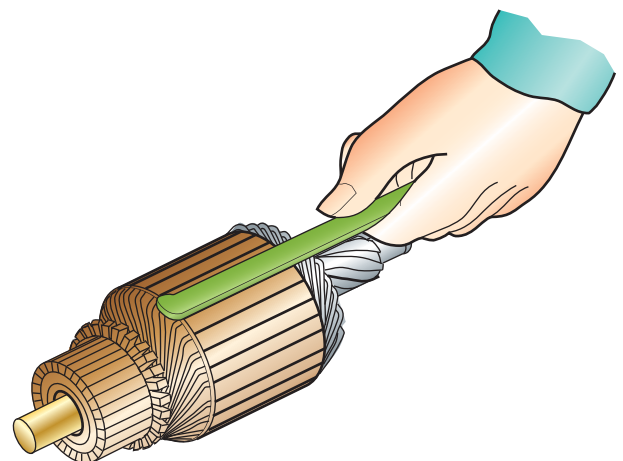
The growler generates a magnetic field. If there is a short, the hacksaw blade will vibrate over the area of the short.
